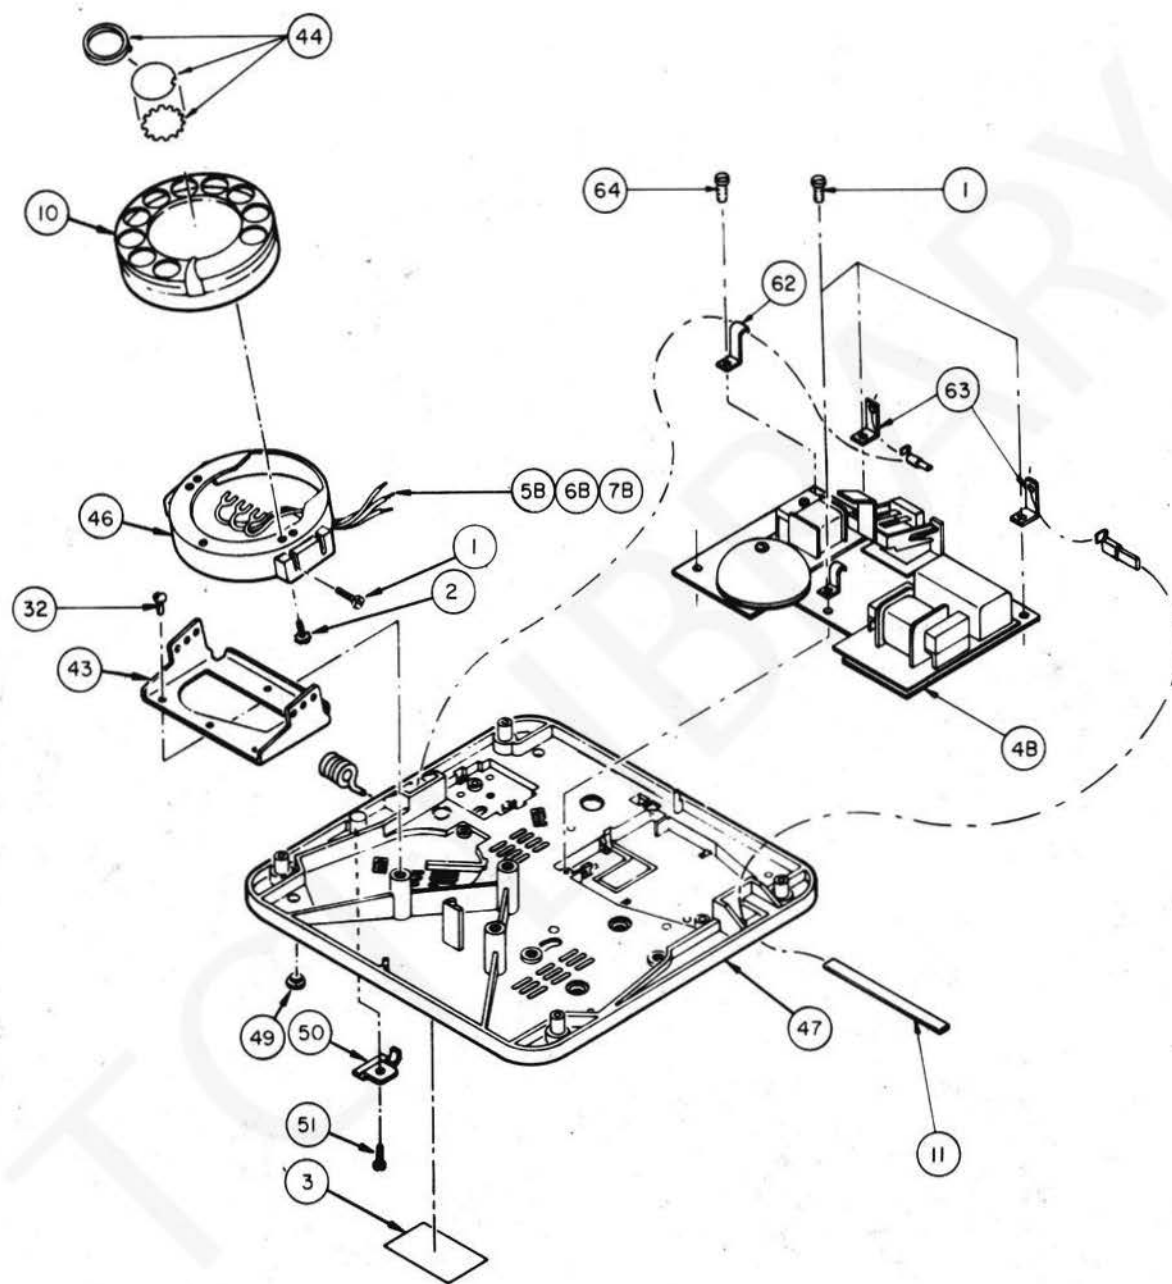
Type Mickey Mouse Phone Assembly of Base
